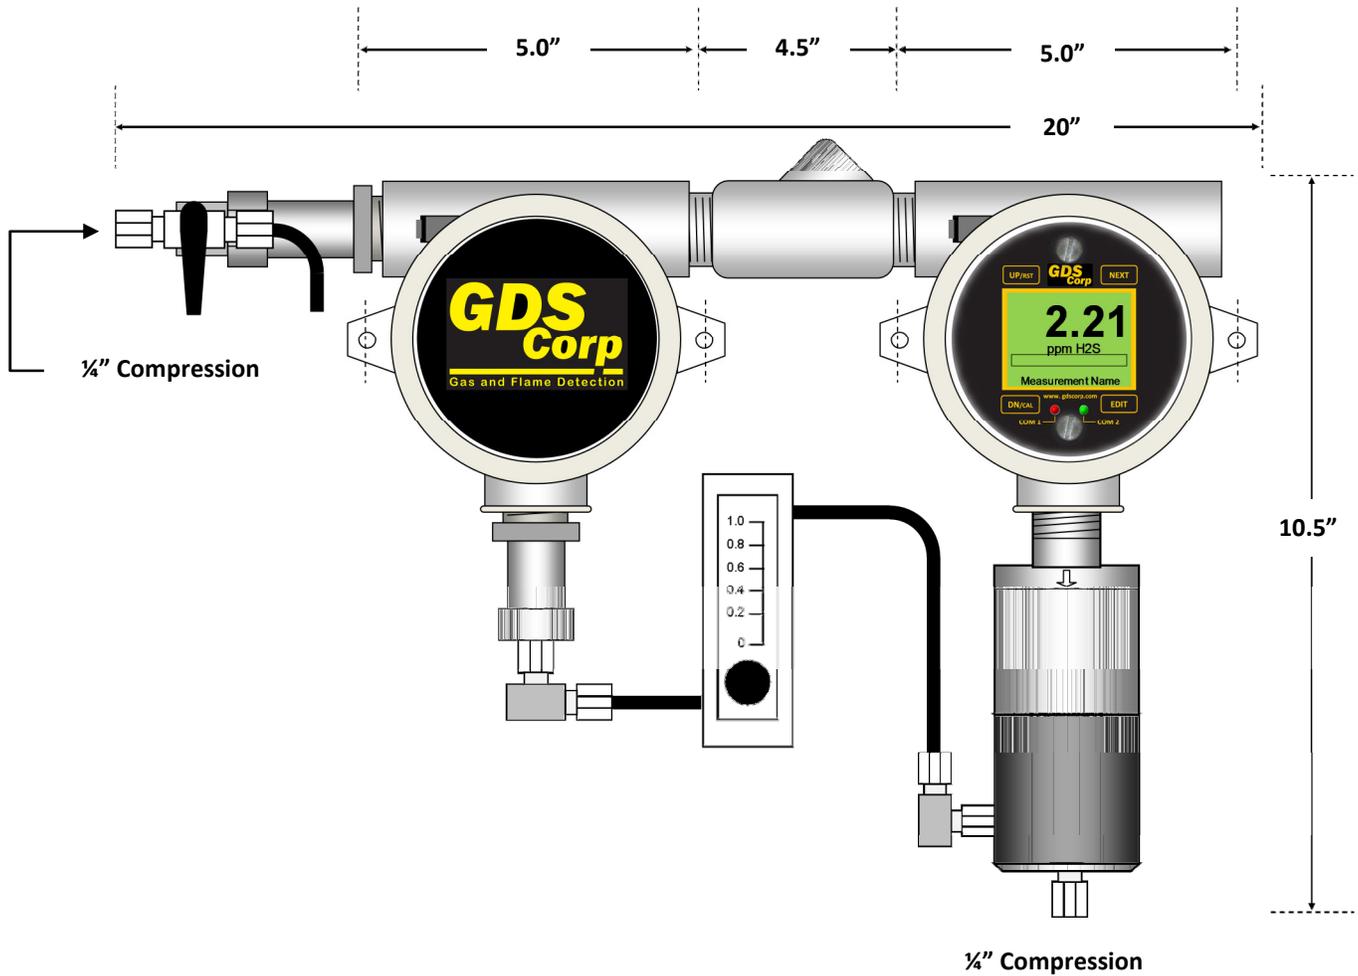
GDS-58NXP Dimensions (Aluminum Enclosure)
